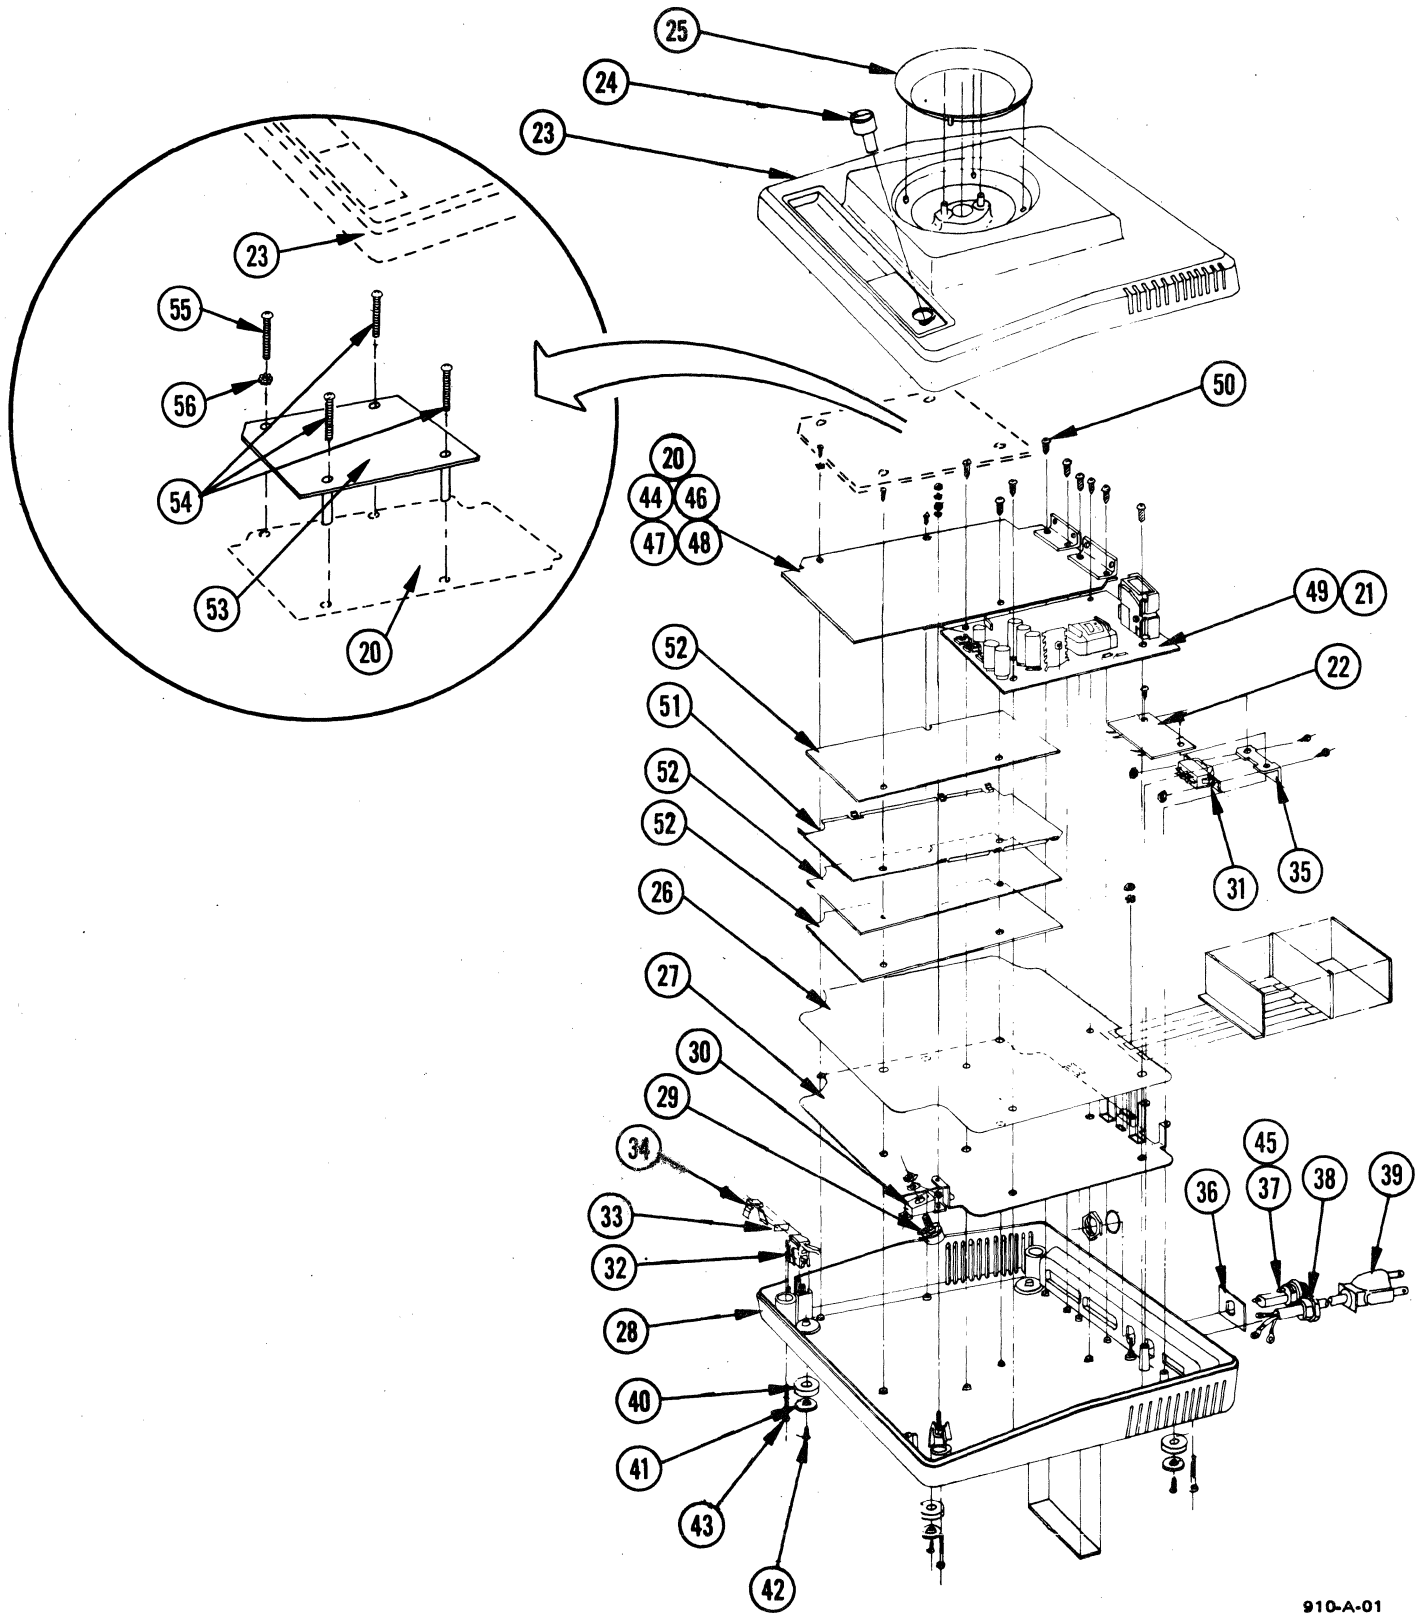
QVT Exploded View Diagram (Lower Monitor Area)
